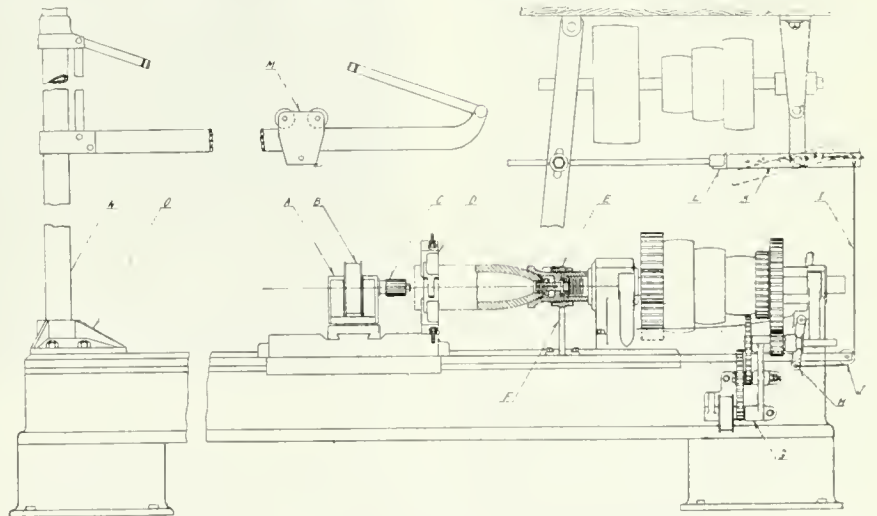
BASE THREAD HOB-MILLING ARRANGEMENT.
